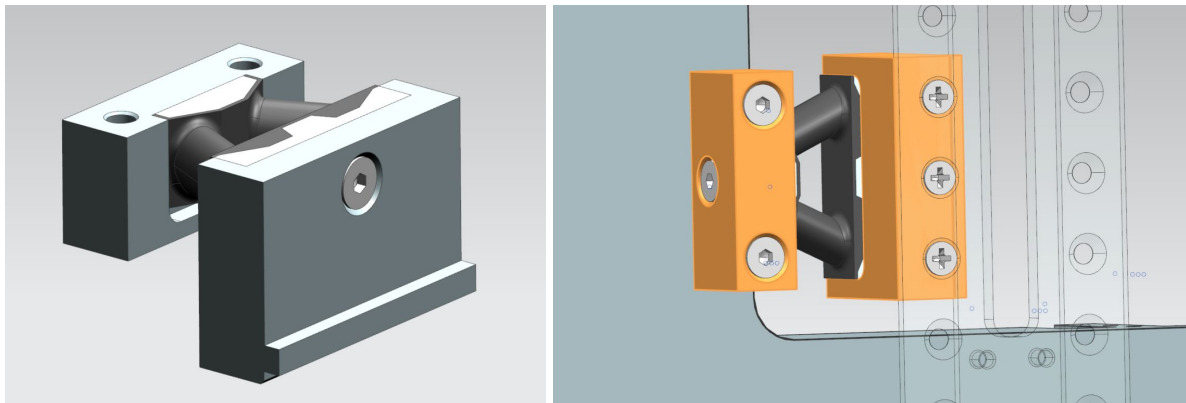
Horizontal damper assembly render (left), shown in position 7 (right)
